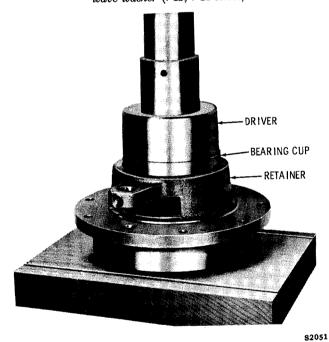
Installing bearing cups into pinion gear bearing retainer (VH, VSI series)
